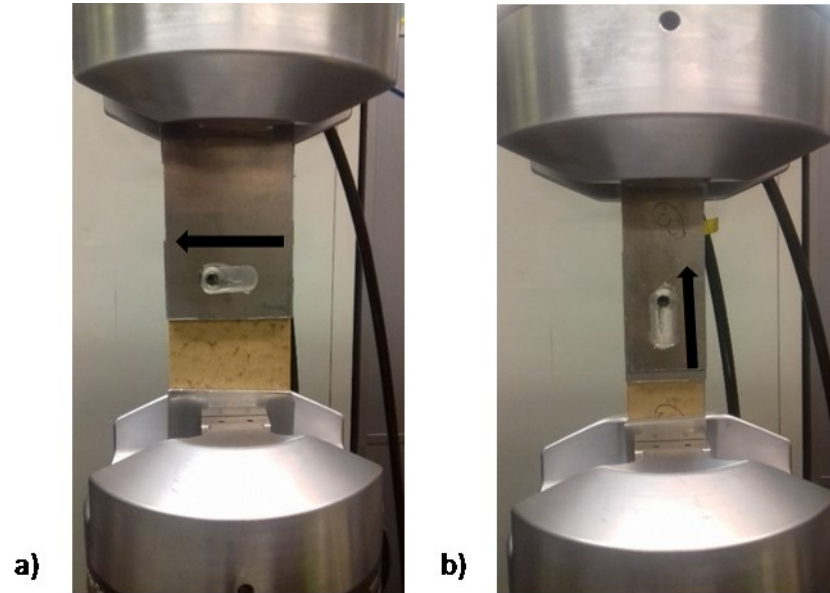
Tensile-Shear test a) Transverse Direction Weld, b) Longitudinal Direction Weld
